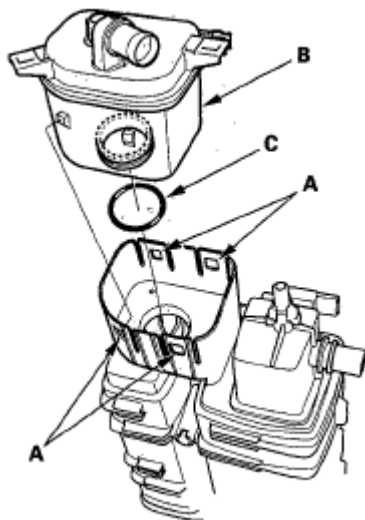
Identifying EVAP Canister Vent Shut Valve With O-Ring
